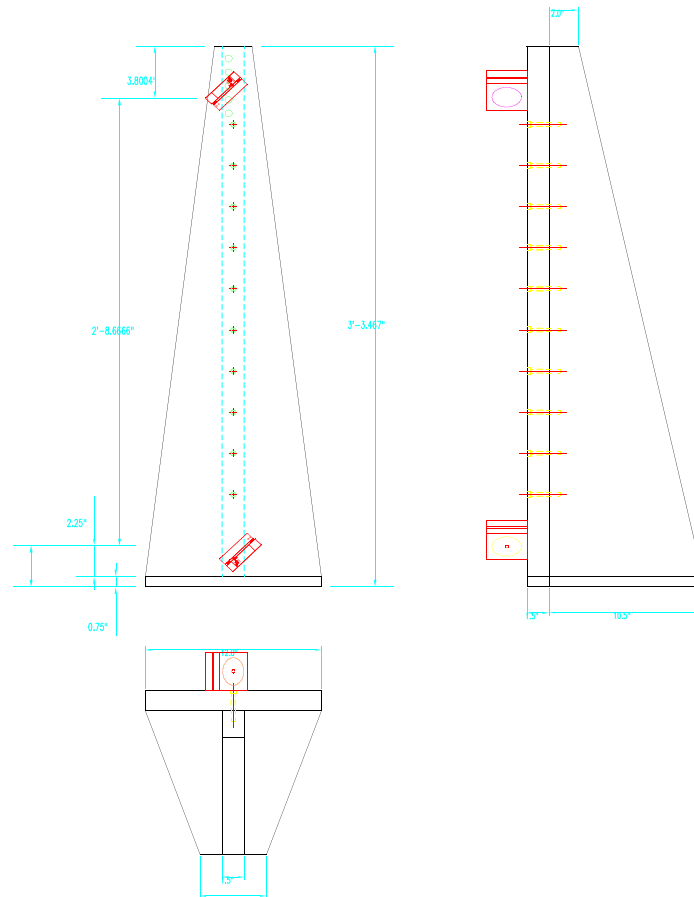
2 km PSL ACAD Opto-mechanical Layout
